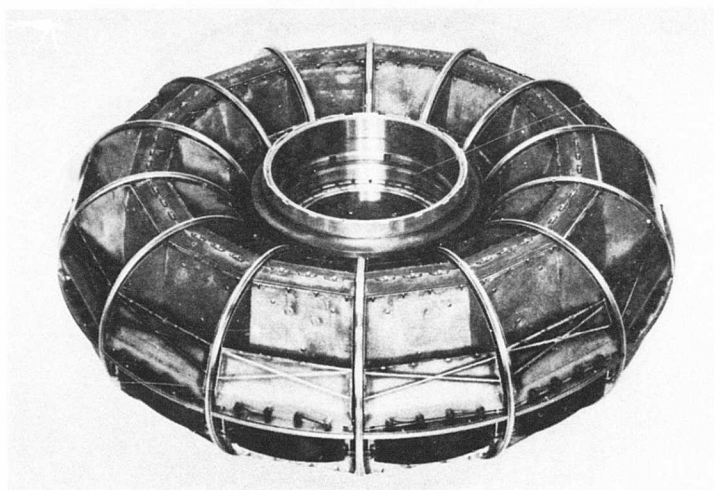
Side View of the Hot Side of the Rotor Assembly.
